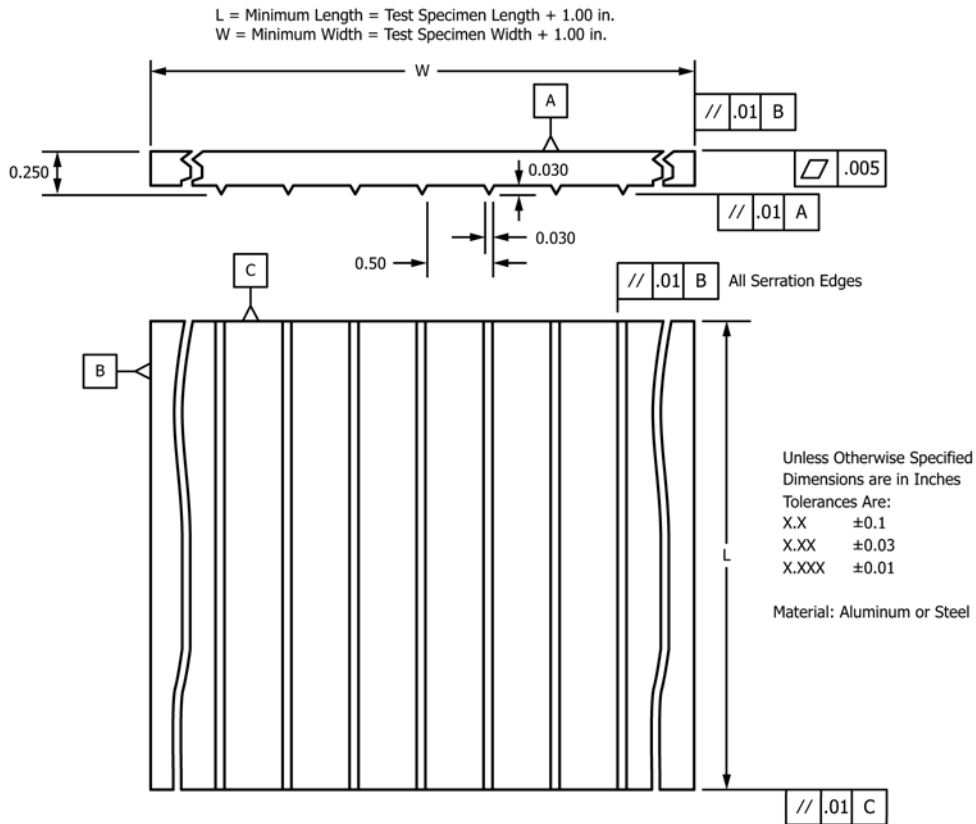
Representative Serrated Plate for Honeycomb Core Material Pre-Crushing (Inch-Pound Version)
